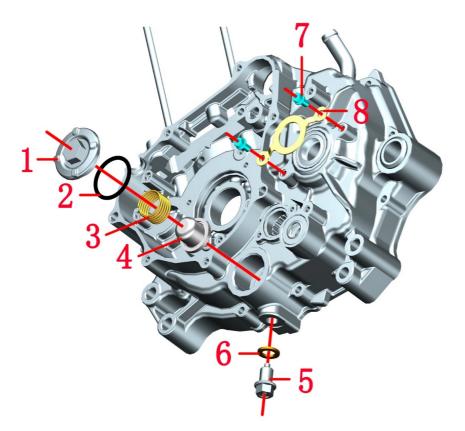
LF	EFT CRANKCASE	77159MII - 6	CHK	401
